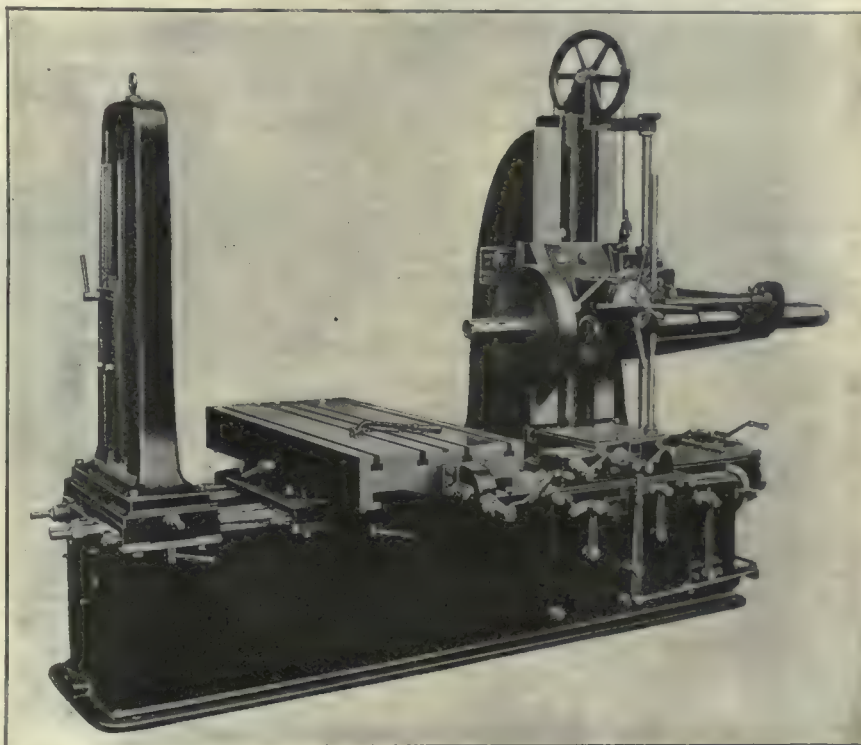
P. & H. NO. 3-T HORIZONTAL BORING, DRILLING AND MILLING MACHINE
